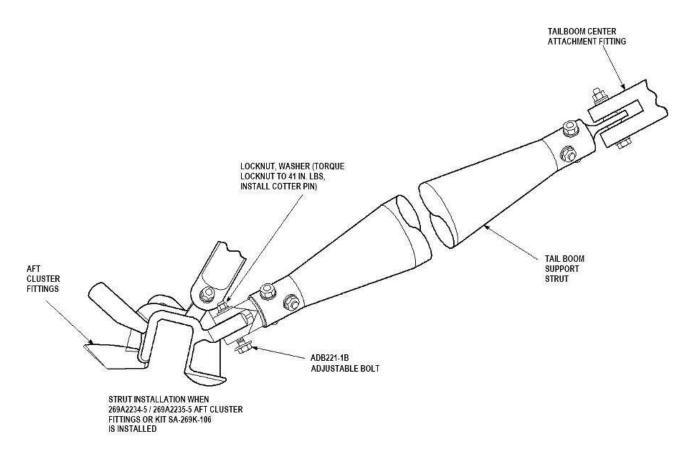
Tailboom Support Strut Adjustable Diameter Bolt Inspection - Replacement
